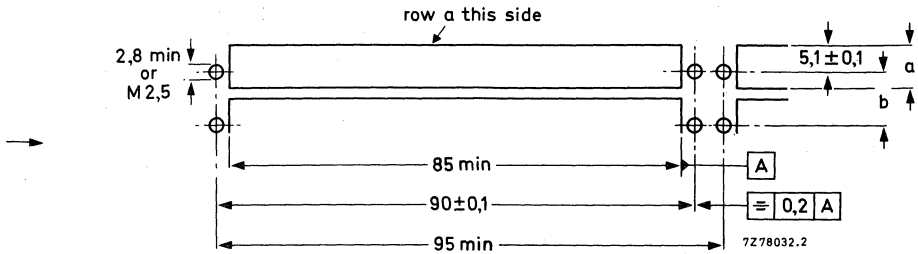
Panel cut-out; see Table 4 for dimensions a and b.
